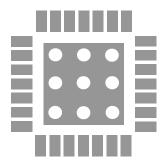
ISL97687 TQFN PCB VIA PATTERN
